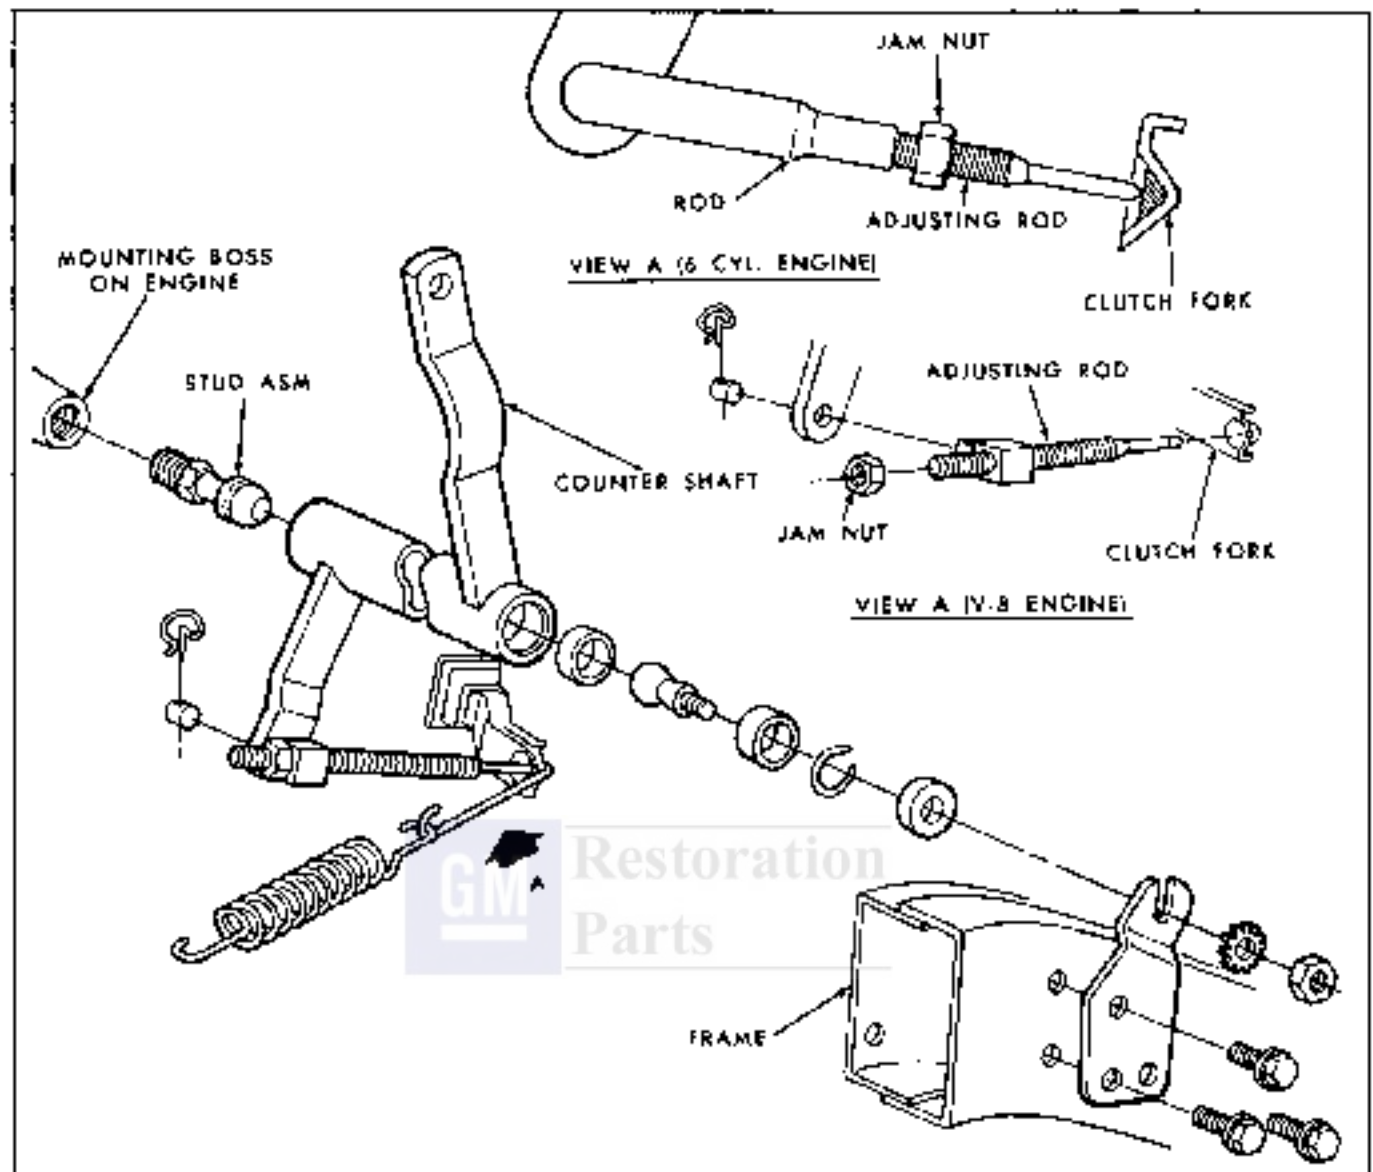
Flywheel Clutch Pedal Adjustment
